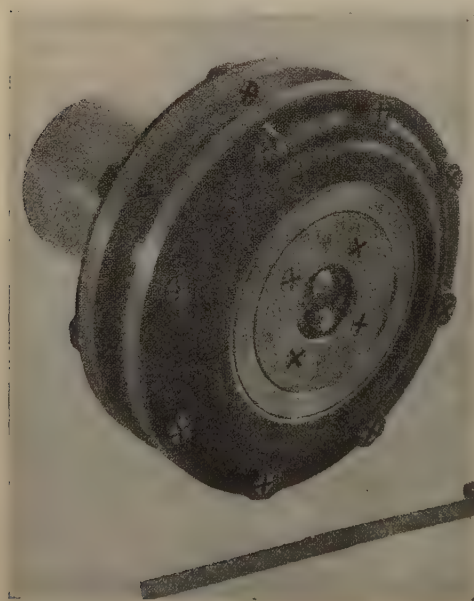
The roller-bearing assembly on the front and rear crank pins.
